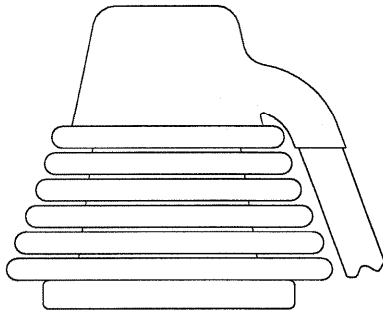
Manual Mechanical Operator (P/N 876992)
